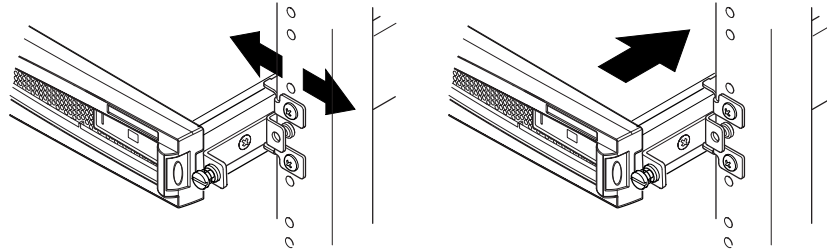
Adjusting the Slide Mounts and Screwing the Server Into the Rack
